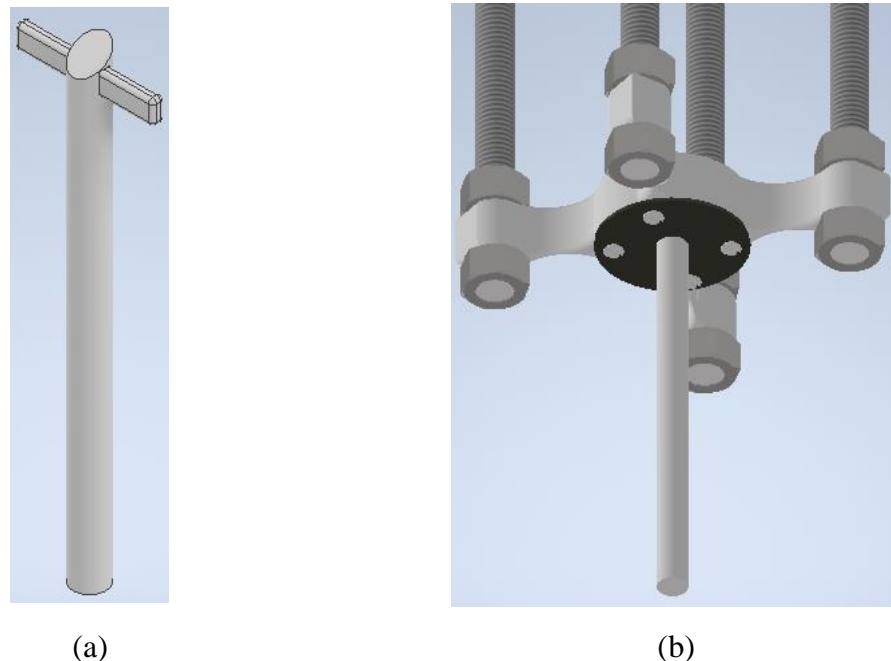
(a) Ceramic core.; (b) Core support piece adapted to the ceramic core.
